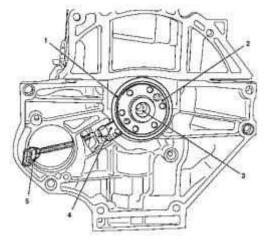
Rear crankshaft oil seal with the sensor: 1 - rear crankshaft oil seal, 2 - encoder, 3 - Crankshaft, 4 - crankshaft sensor, 5 - connecting cable to plug the wiring harness of the crankshaft sensor
